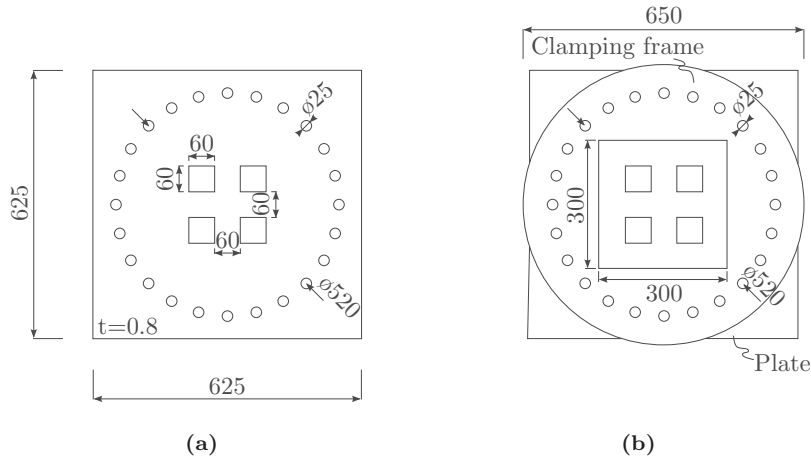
Geometry of the flexible plates: (a) plate with pre-formed holes and (b) clamping assembly. All measurements are in mm.
